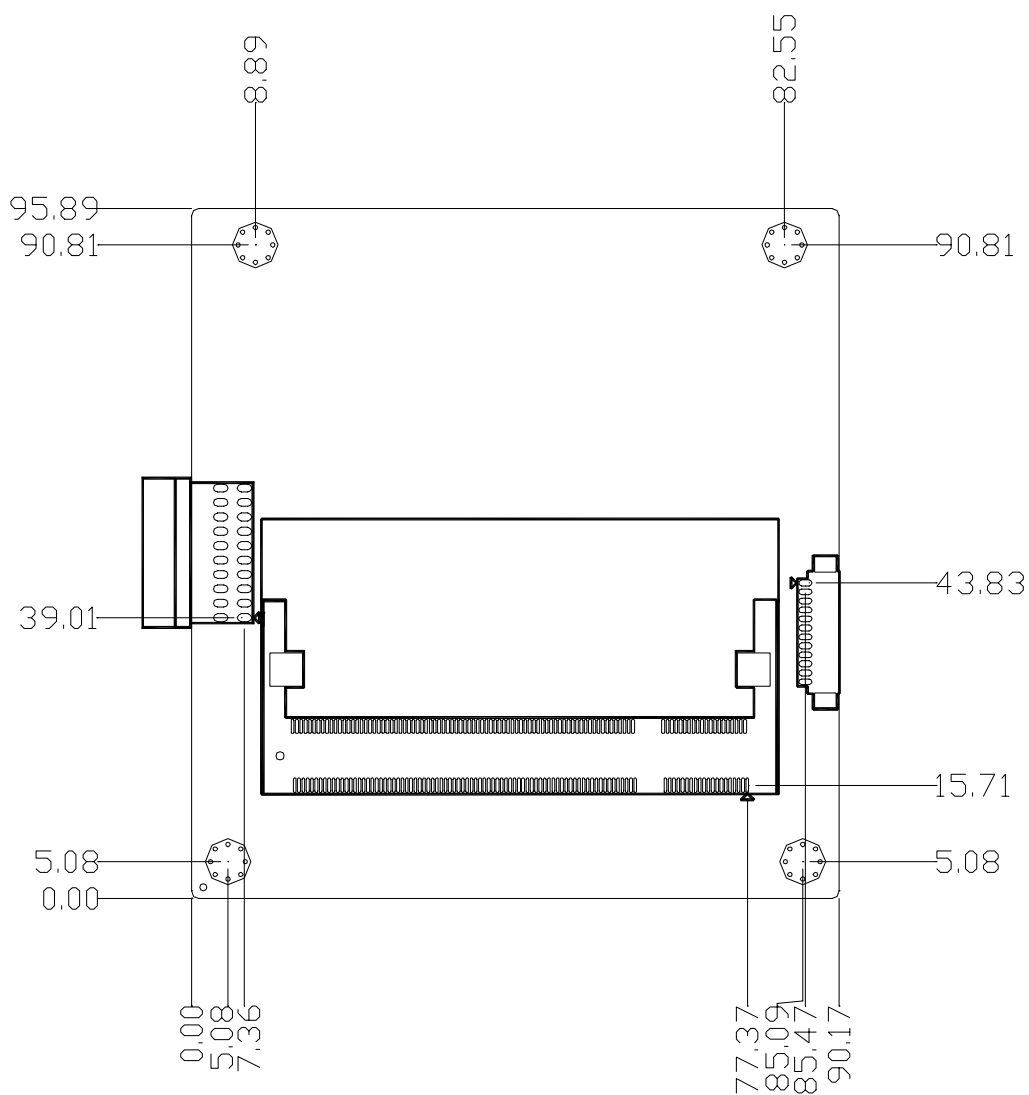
PCM-3362 Mechanical Drawing (Solder Side)
